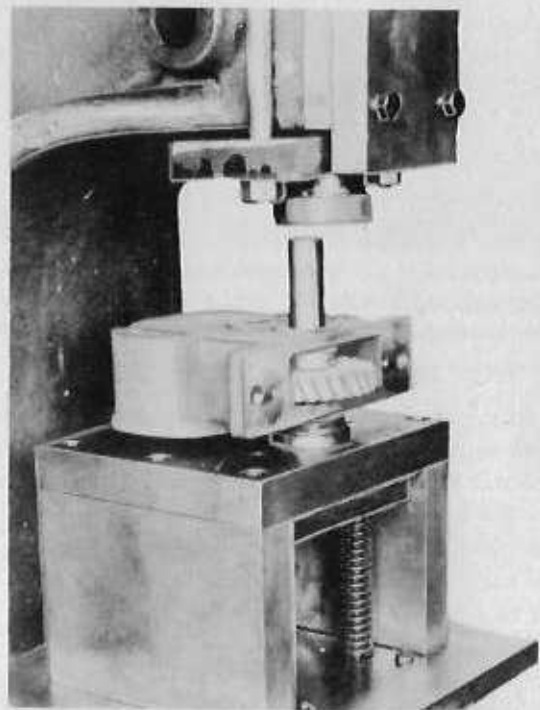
INSTALLING SHAFT IN MAGNETO GEAR CASE
